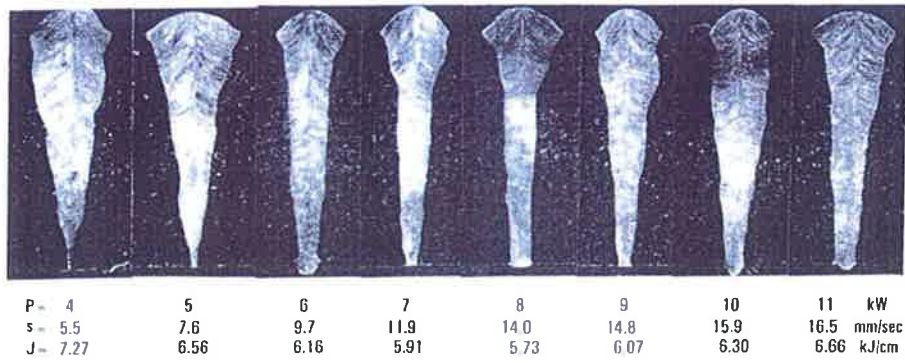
Weld Bead profile for full penetration weldment at different combinations [133].
